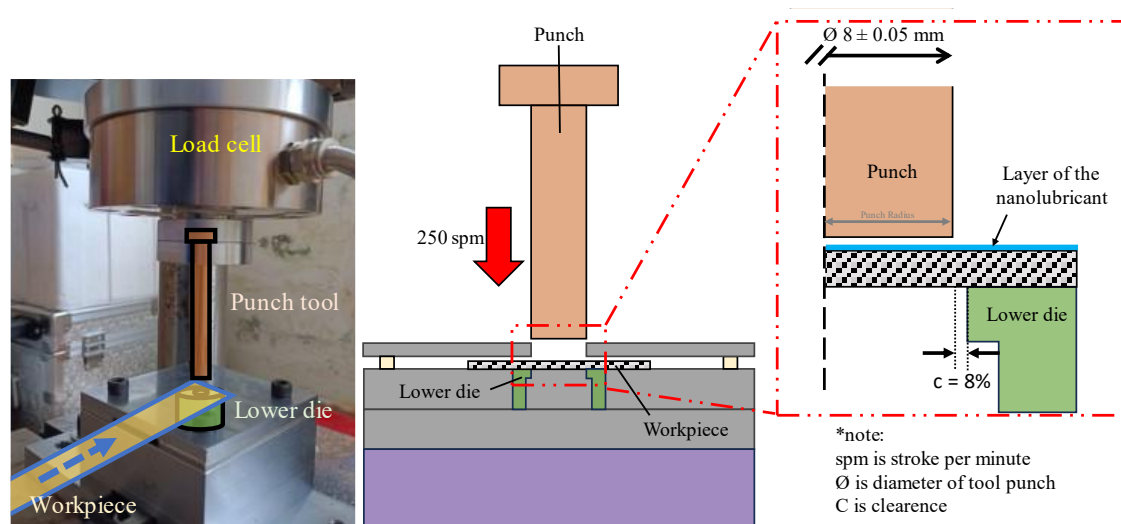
The machine equipped with punching tool, lower and a load cell for measurement of the punch force and the backstroke force and the schematic of punching test.
